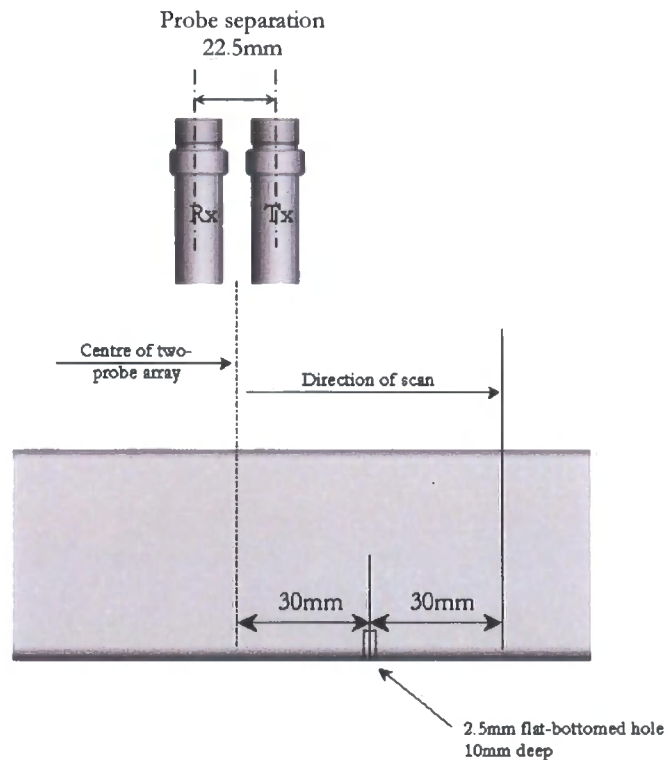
Drawing of the immersion set-up used for the flat-bottomed hole test
